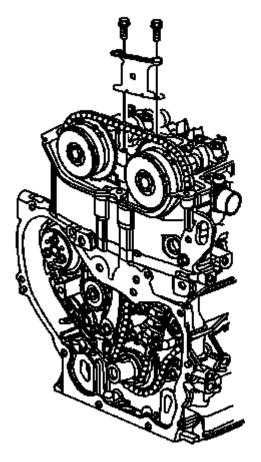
Timing Chain Crankshaft Sprocket Courtesy of GENERAL MOTORS COMPANY
